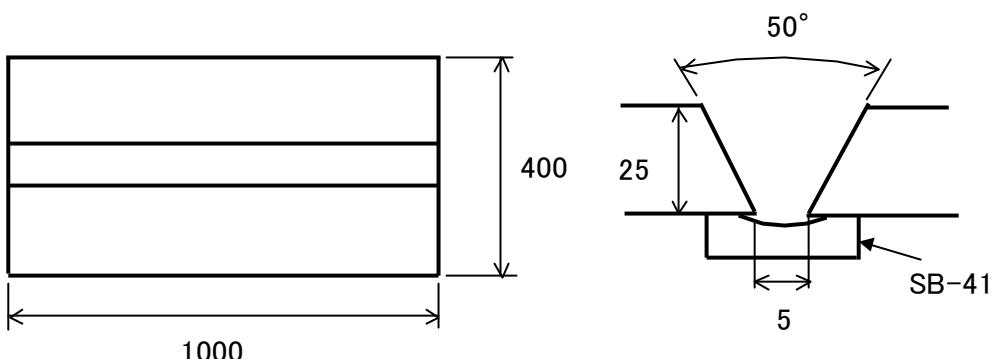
Test plate and groove geometry (400MPa Steel for Ni-added Coastal Weathering Steel)
